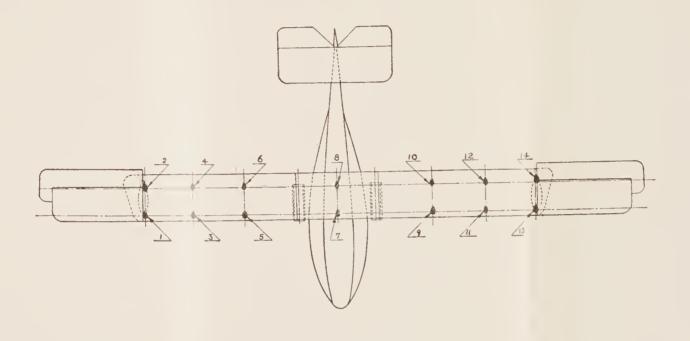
GENERAL ARRANGEMENT PLANS.
